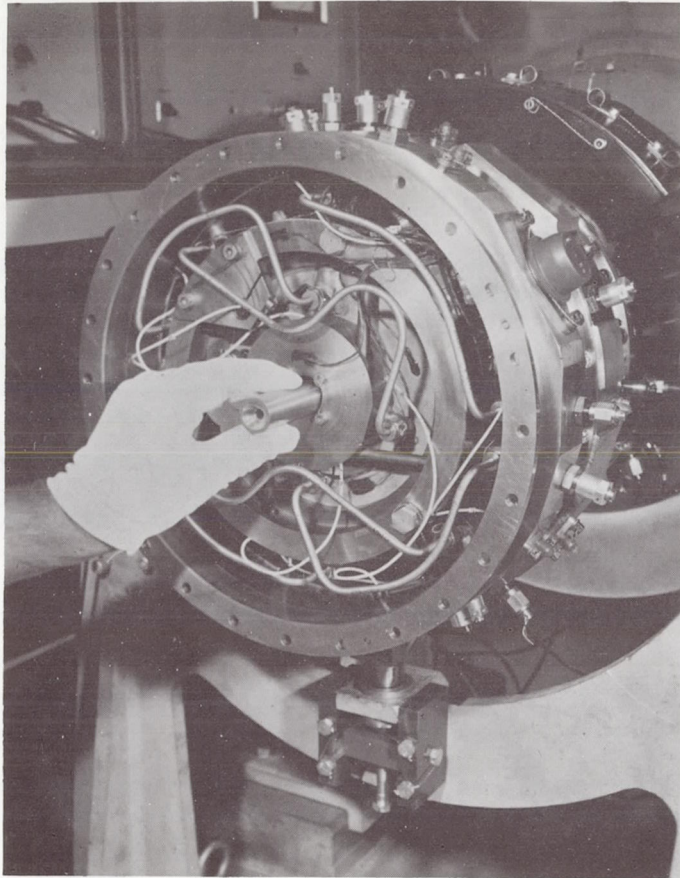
Positioning Rear Axial Shipping Fixture Against Thrust Runner
